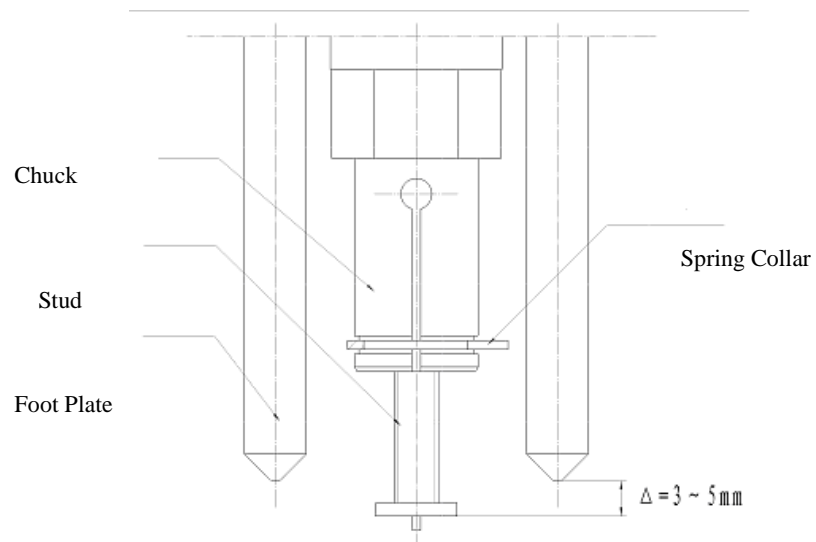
The adjustment of stick out length (Contact Type Welding torch)
